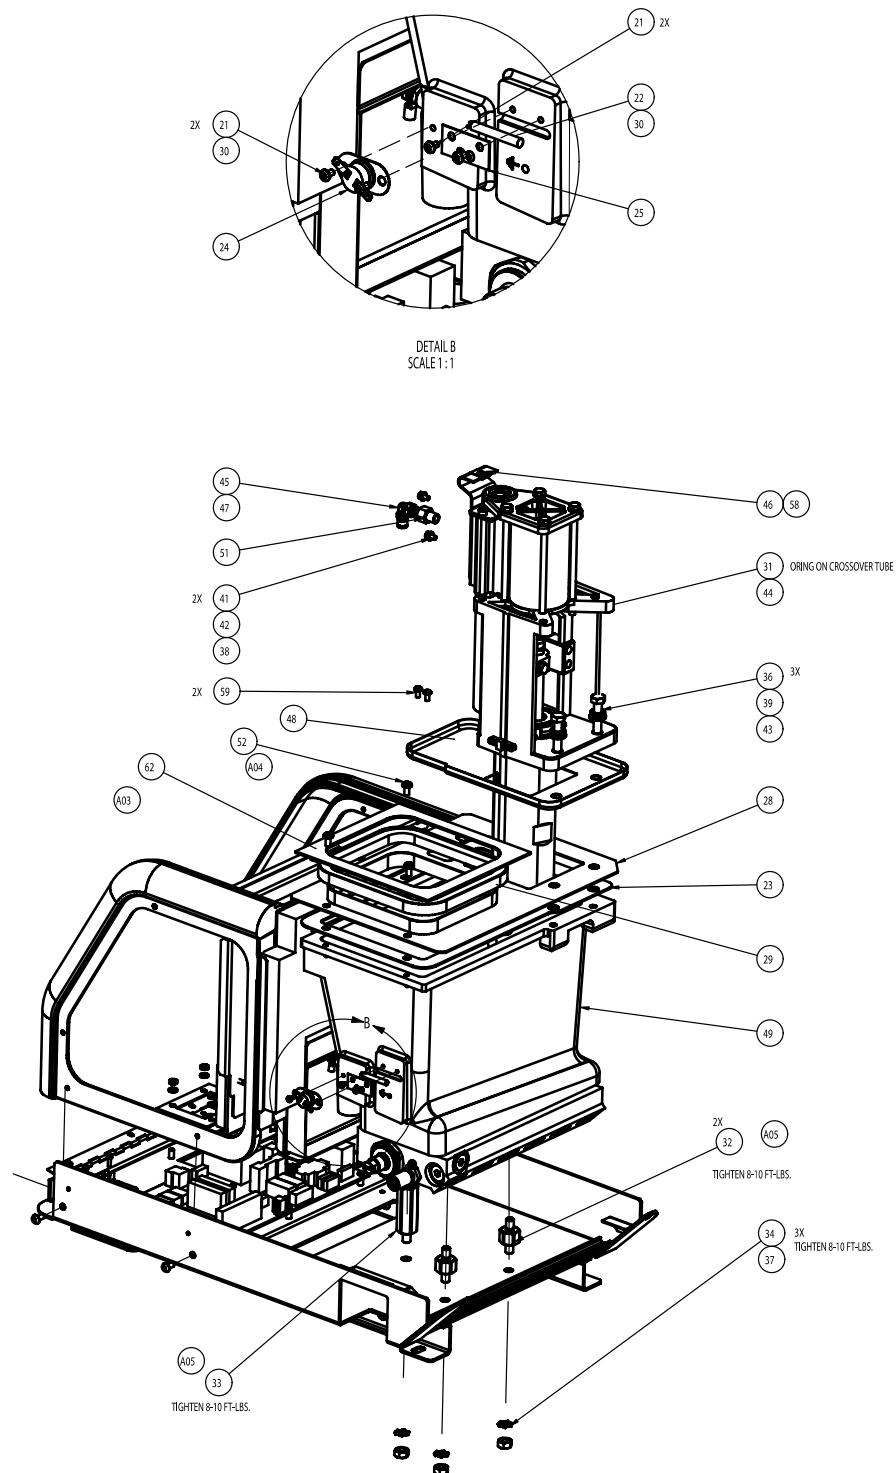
Chassis parts, 400/480V Delta, M4/M6/M9 (2 of 2)
